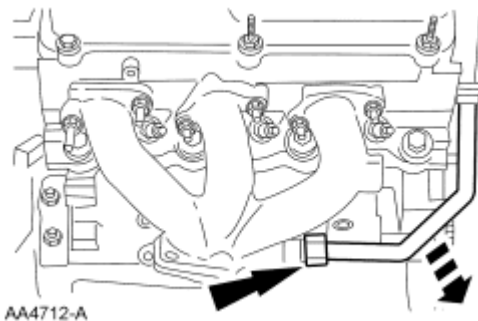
EGR System Module-To-Exhaust Manifold Tube
